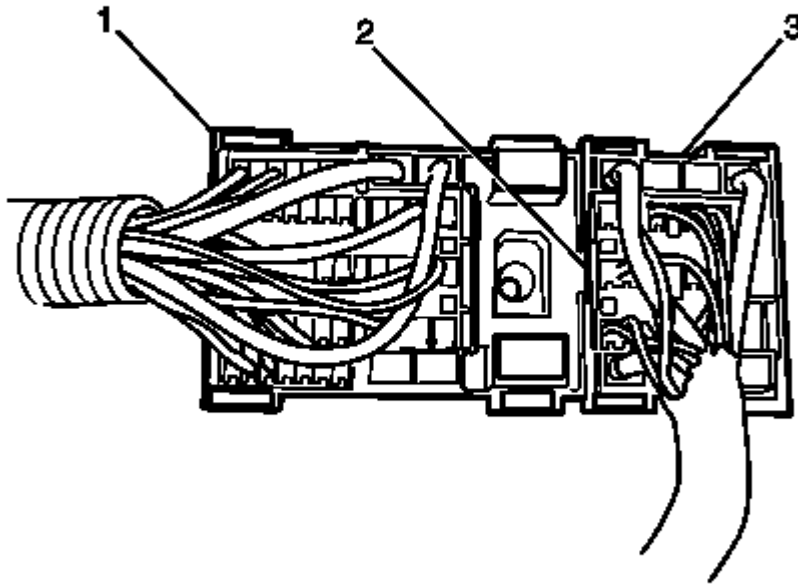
Identifying Engine Connector, Locking Tang & Body Harness Connector
